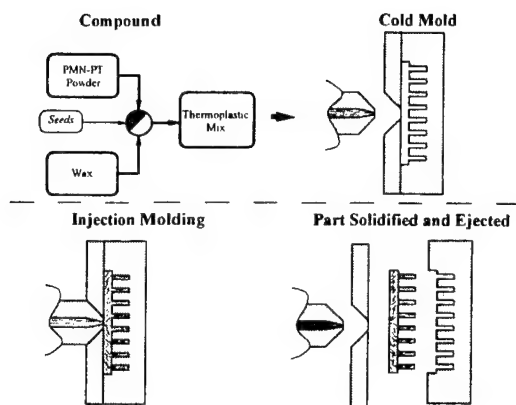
Injection molding of 1-3 preforms with integrated seeds.
